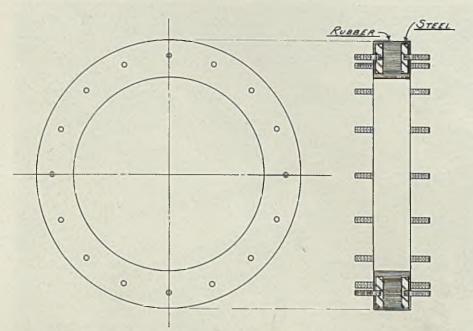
Cross section of expansion joint which employs soft rubber as so'r joining medium
